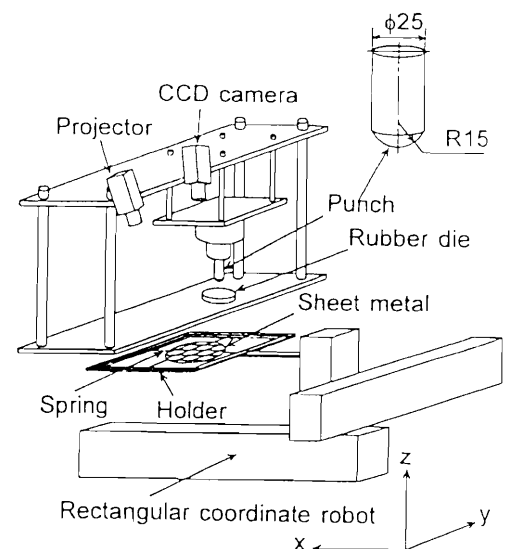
INCREMENTAL FORMING MACHINE WITH HEMISPHERICAL STEEL PUNCH AND RUBBER DIE.
